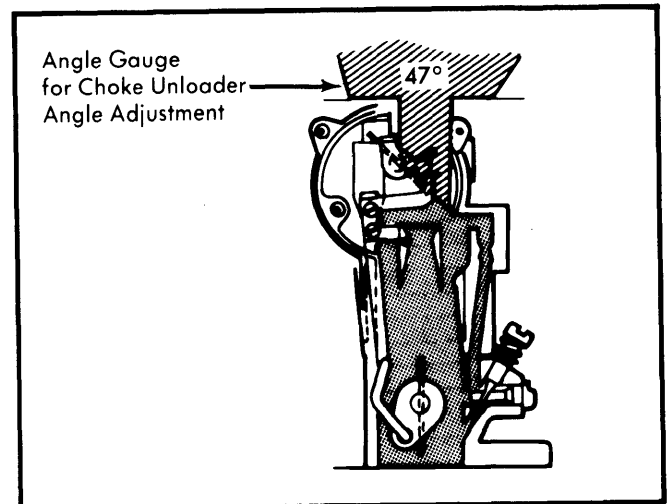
Adjusting Choke Unloader Angle with Gauge
